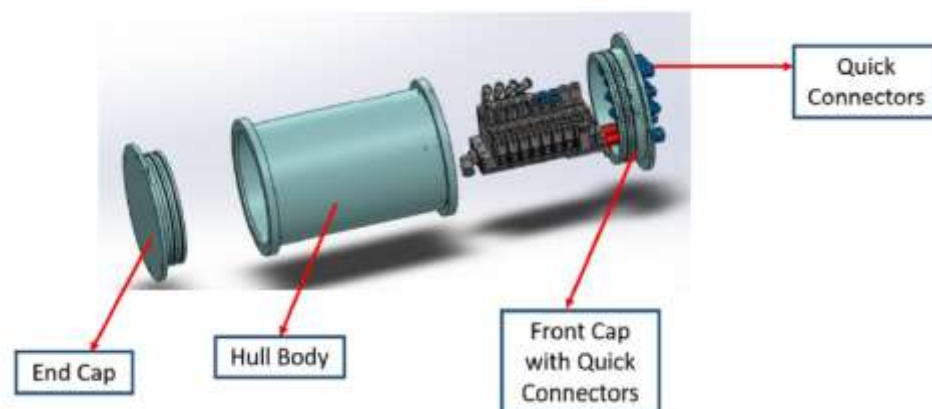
Partially Exploded CAD View of Pneumatic Housing
